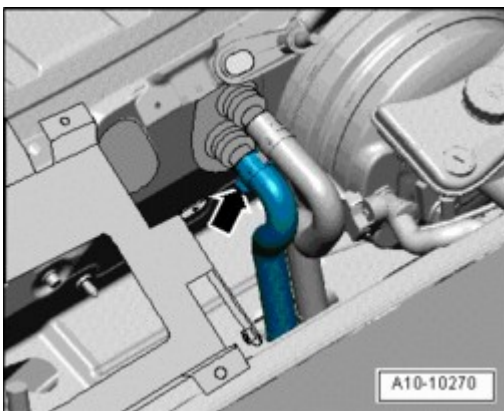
Removing Lower Coolant Hose At Heat Exchanger
